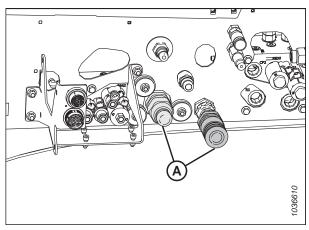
Header Hydraulics Configuration – Rotary Disc-Ready with Quick Couplers
